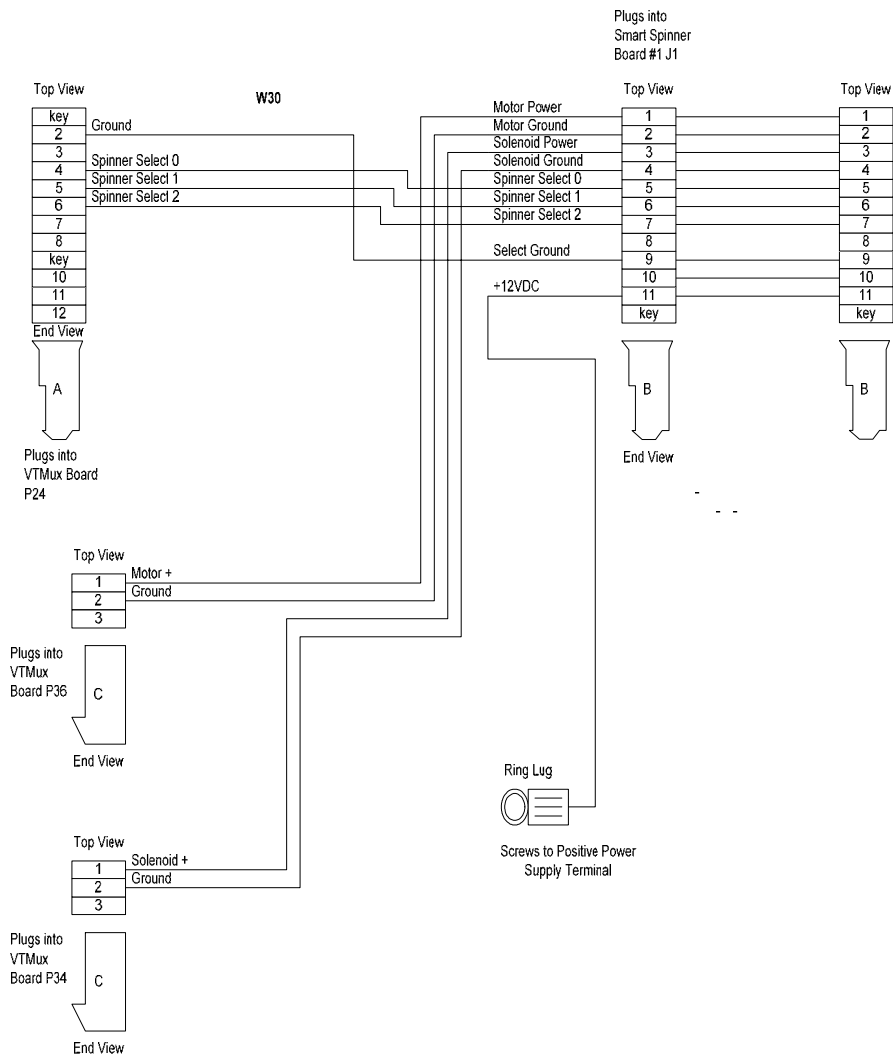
POWER SUPPLY TO SPINNER BOARDS #1 & 2 J1s7
